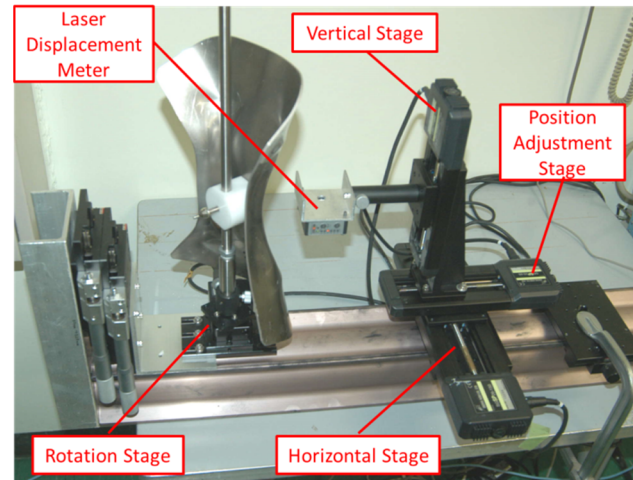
Setup for 3D shape measurement system using laser displacement meter.
